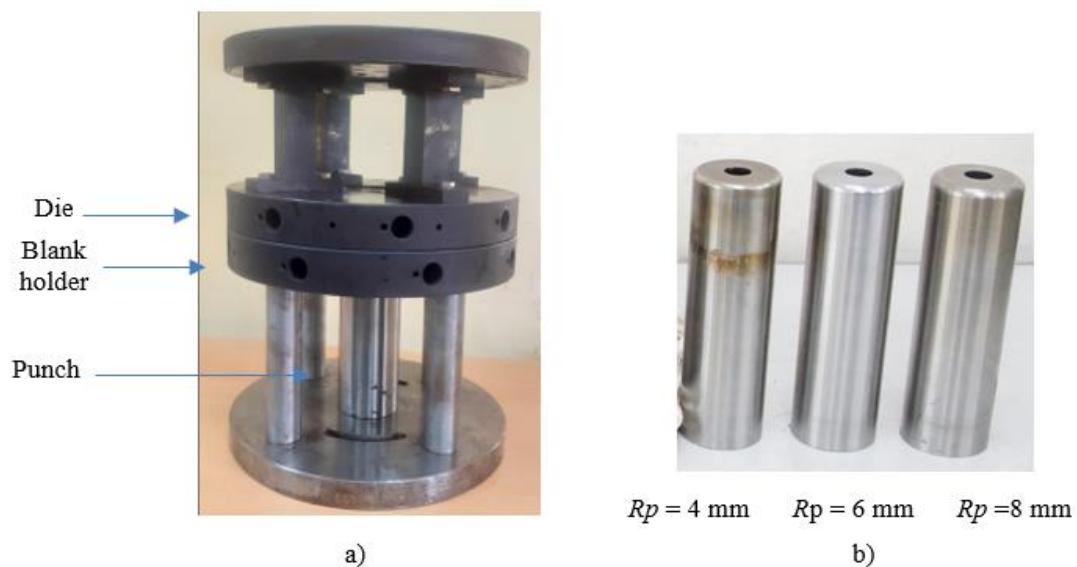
The deep drawing process mold (a) and various punch of deep drawing processes (b)
